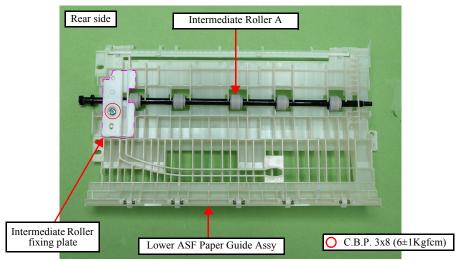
Removing the Lower ASF Paper Guide Assy (3)
